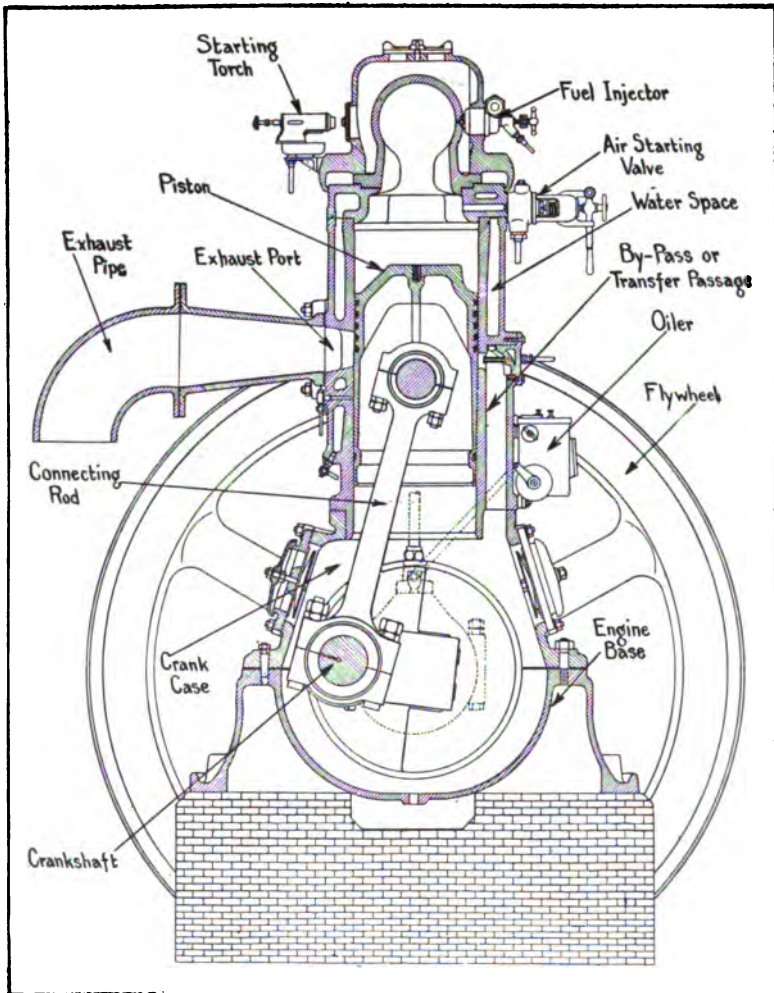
Sectional view through cylinder of the Robey crude oil-engine, employing hot bulb ignition and injections of the fuel charge.
